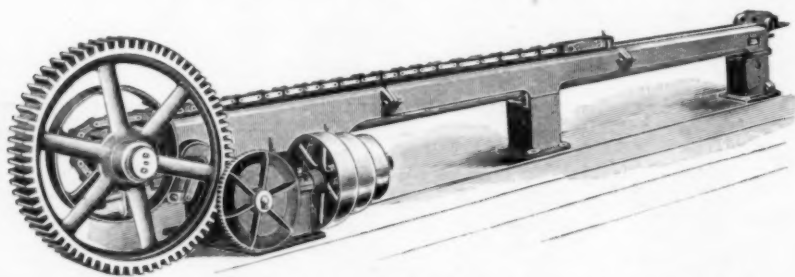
DRAWBENCH FOR DRAWING THE TUBE BEFORE AND AFTER BRAZING.
